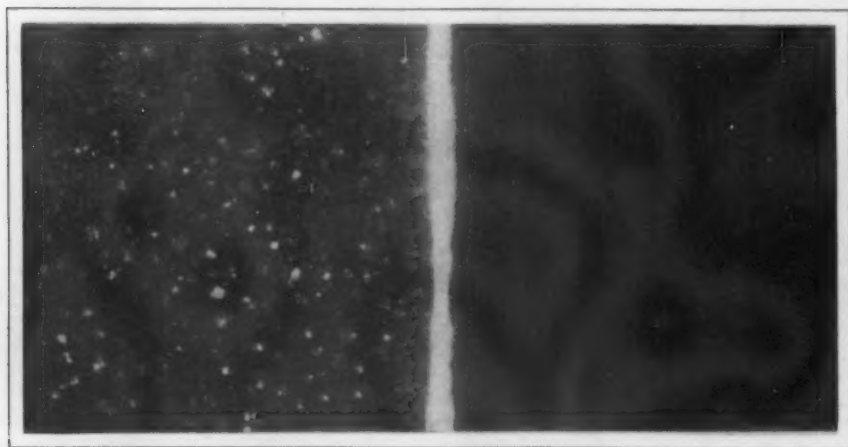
Radiograph of a Block of "Unboronized" (Pure) Copper Side by Side with a Block of "Boronized" (Pure) Copper. The Difference in Internal Structure is Striking
